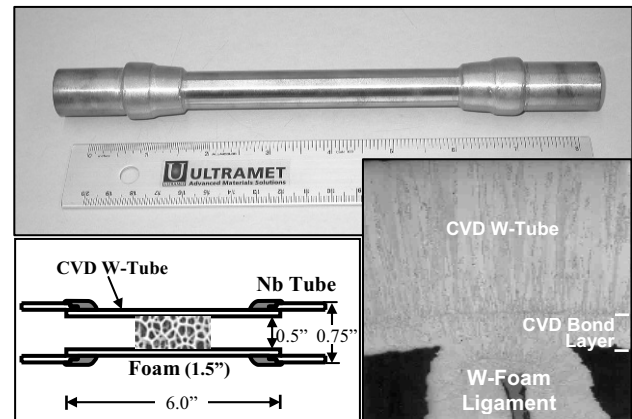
The axial flow FIT heat exchanger tube concept; as fabricated by Ultramet Inc. and tested at the SNL (top); nominal dimensions (bottom left); optical micrograph showing a W-foam ligament CVD-bonded to the inner wall of a $0.05''$ thick W-tube (25X) (bottom right).¹⁰
